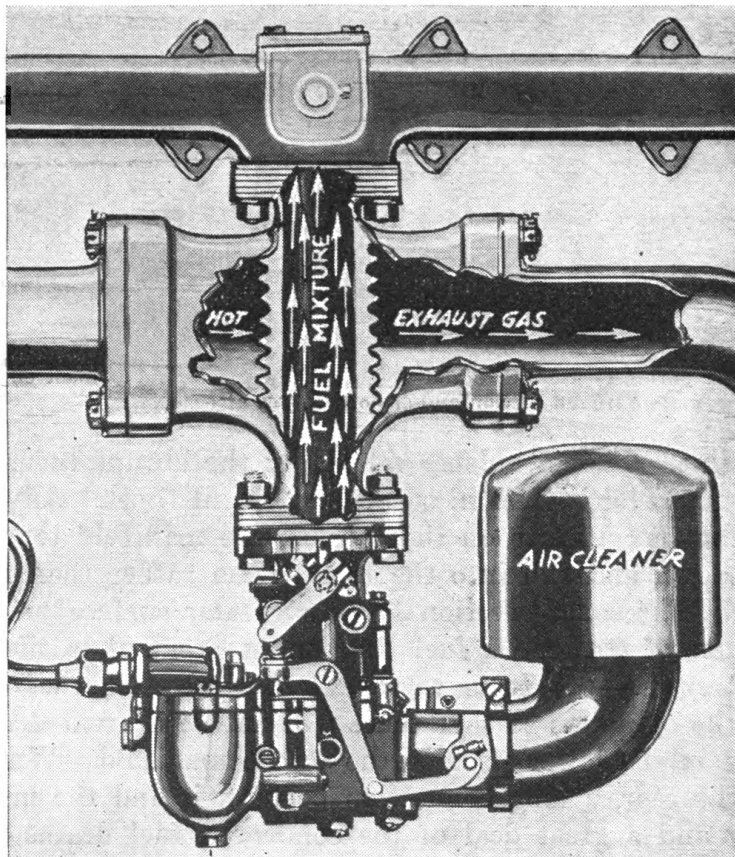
Carburetor with "hot spot" or heated intake manifold.
